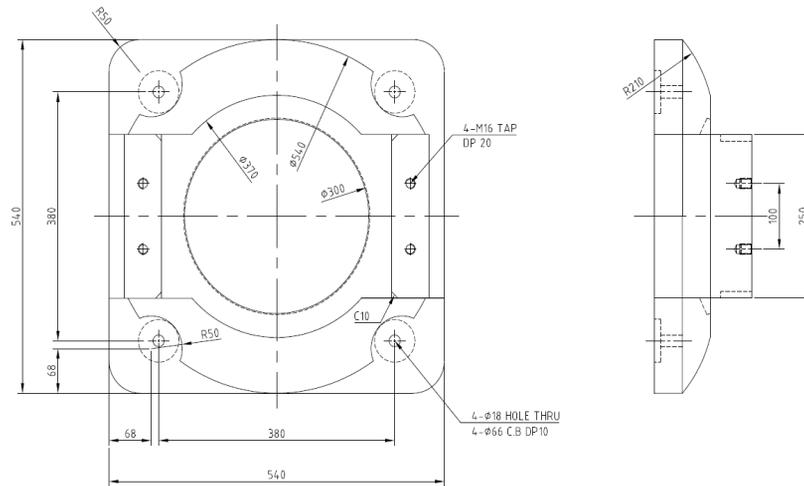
Dimensions of 4500kN MSM spherical bridge bearing
